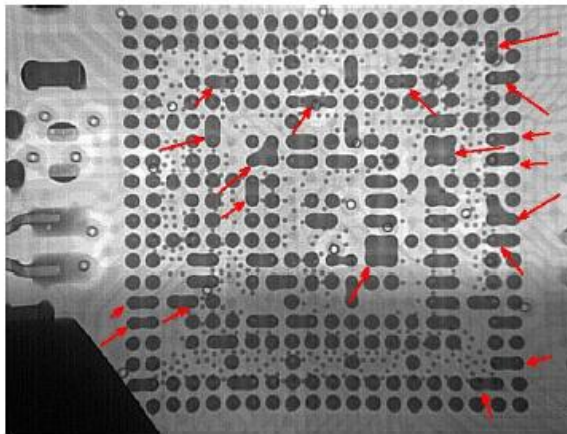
Solder shorts in TV 8 0.4mm pitch boards
